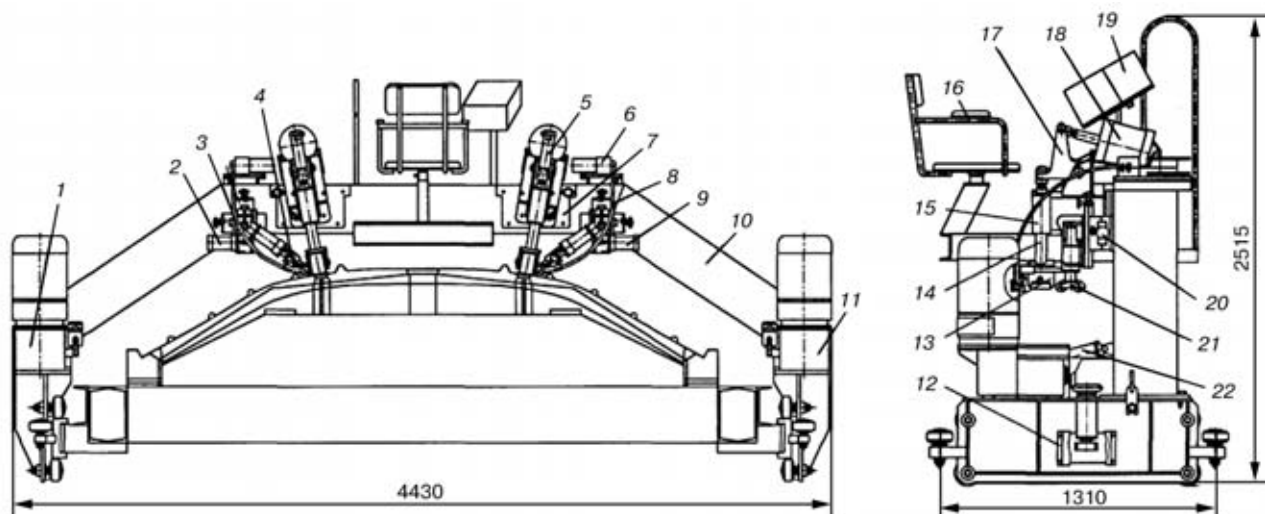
Welding gantry: 1, 11 — carriage; 2, 9 — tracer; 3, 8, 20 — corrector; 4 — welding torch; 5 — pneumatic clamp; 6 — A-1197S semi-automatic machine; 7 — flange; 10 — beam; 12 — casing; 13 — press-down roller; 14 — rod; 15 — bracket; 16 — chair; 17 — lever; 18, 22 — pneumatic cylinder; 19 — control panel; 21 — tracer rollers
